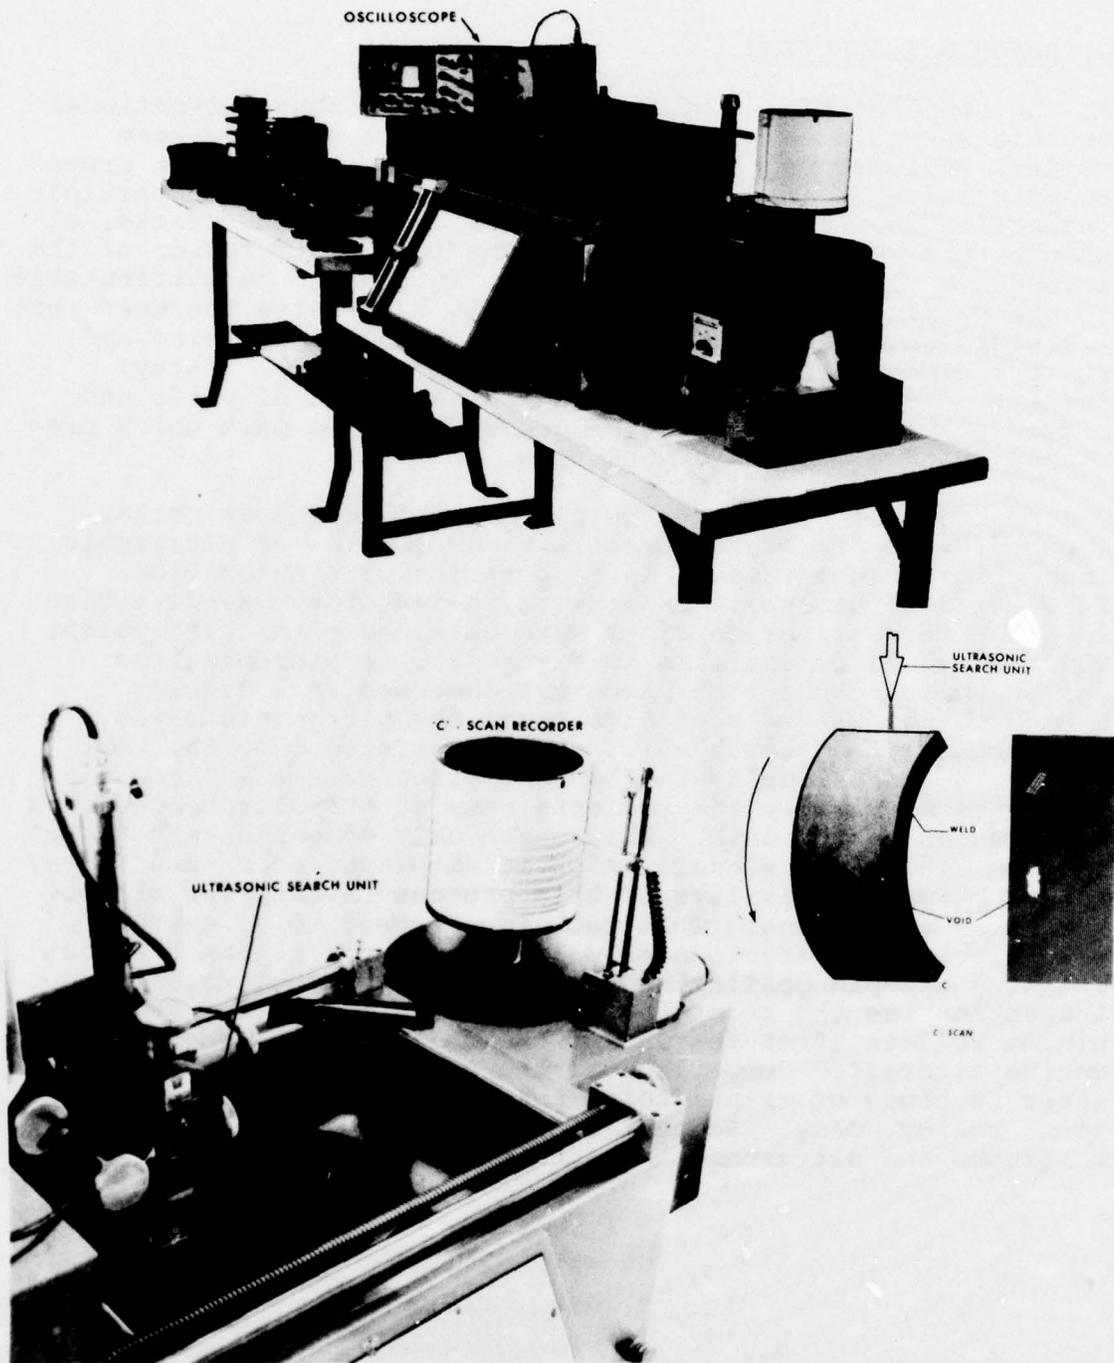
Ultrasonic Inspection of Electron-Beam Welds.
